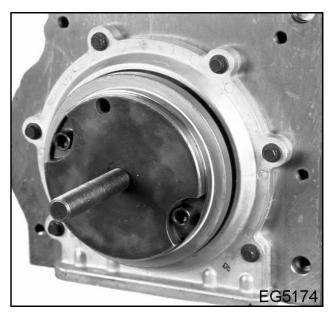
Attach Rear Oil Seal and Wear Sleeve Installer
